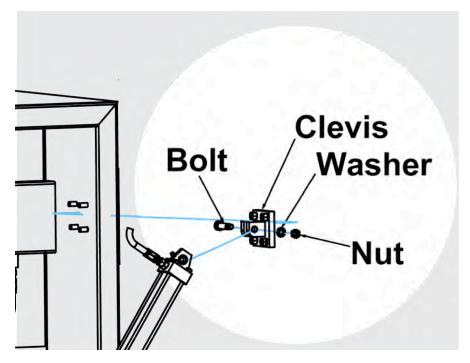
Hydraulic Cylinder Installation, Control Cabinet
